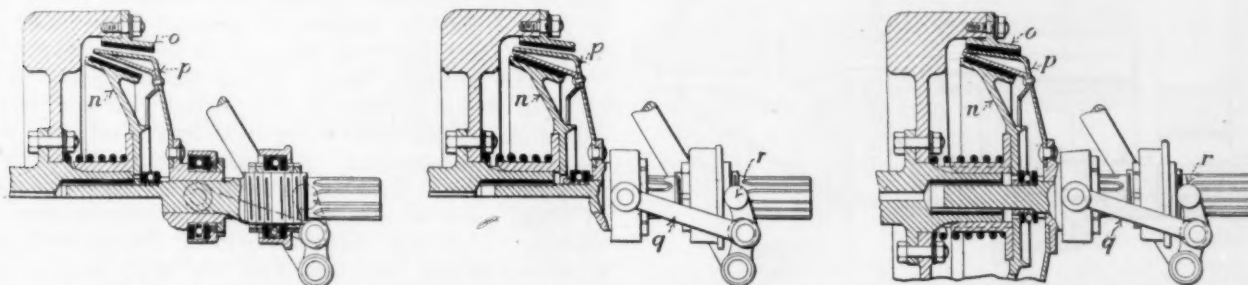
THREE POSITIONS, DISENGAGED, PARTLY ENGAGED AND FULLY ENGAGED, OF A DOUBLE-CONE CLUTCH
